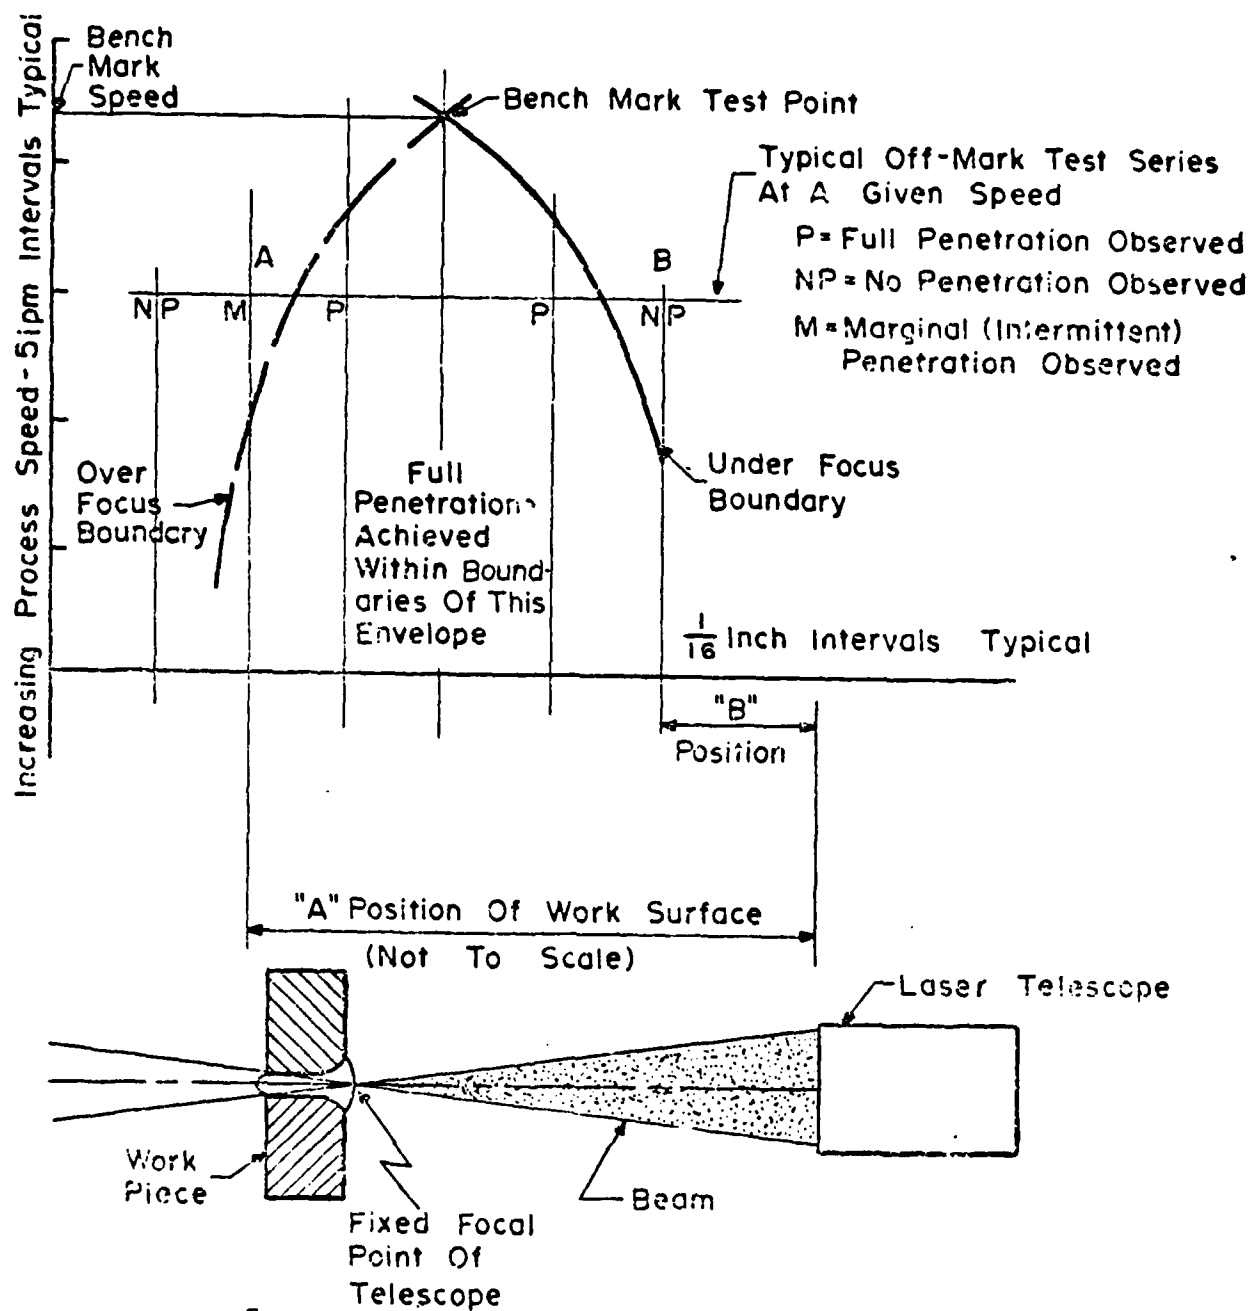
Bench mark test point and off-mark survey of full-penetration laser welding conditions.
